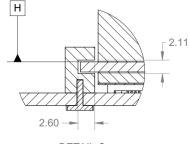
LFF Baseboard Chassis CTF Dimensions (Side View)
